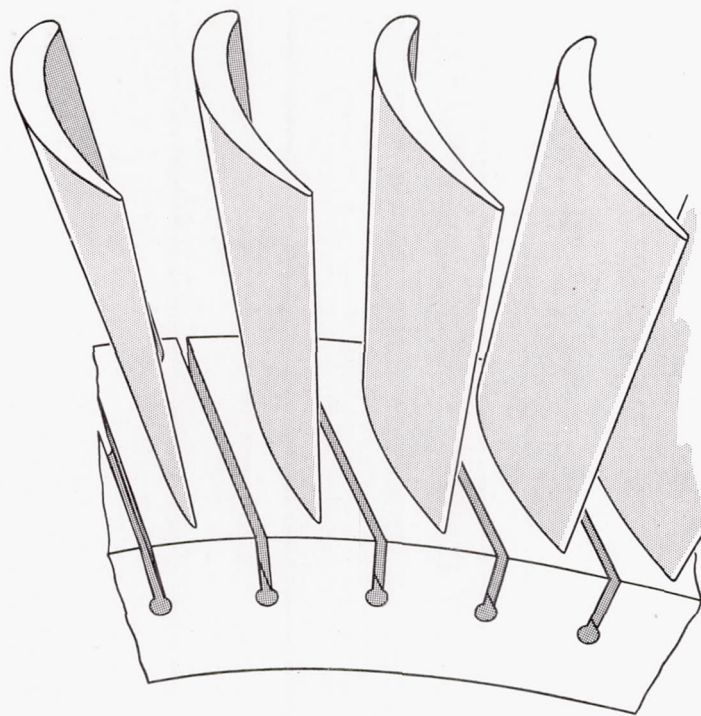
Welded blade attachment with keyhole slots (from ref. 11).
